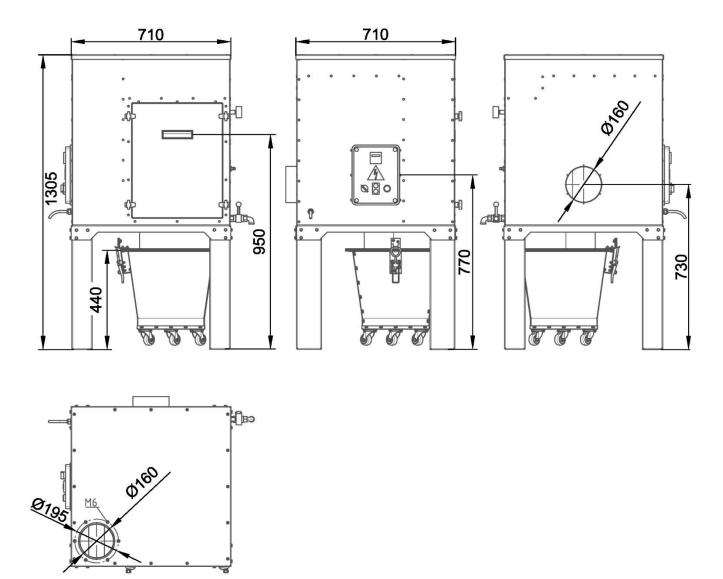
Dimensions of the filtering unit BIG-1000-O
